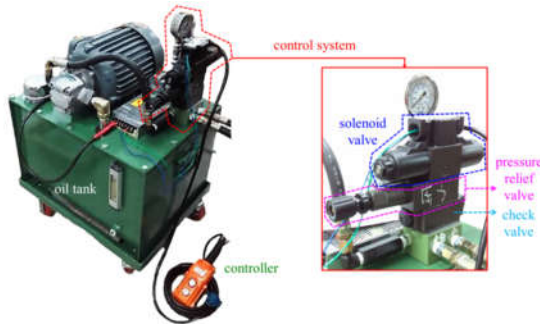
Oil hydraulic system for the magnetic-assisted injection molding
